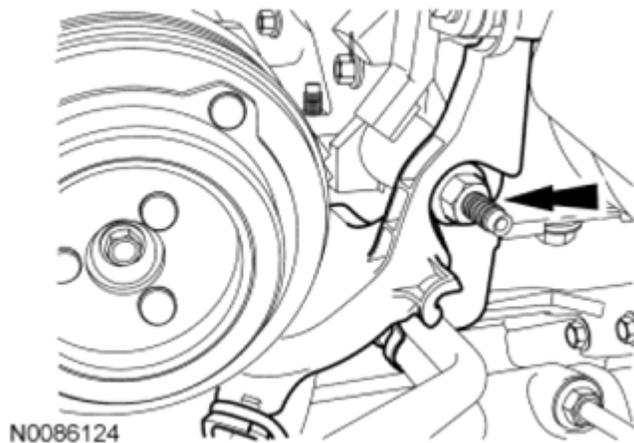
Locating Transmission Cooler Tube Support Bracket And Nut
